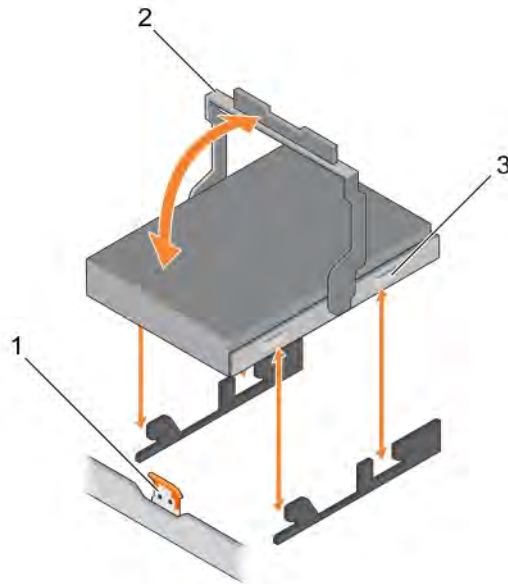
Removing and installing a hard drive carrier from the hard drive tray
